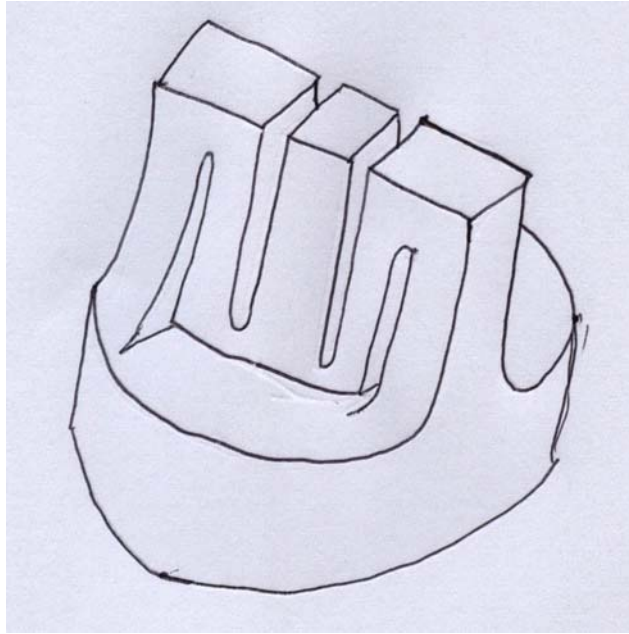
A schematic drawing of a folded horn design, which is easily manufactured and does not require screw threads in the acoustic path.
